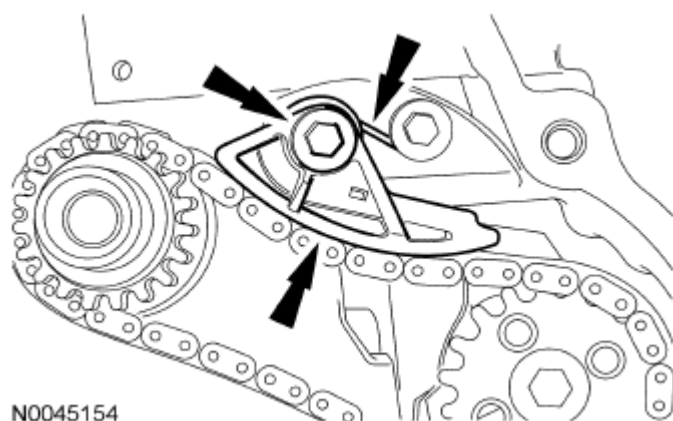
Locating Oil Pump Drive Chain Tensioner, Bolt And Tensioner Spring
